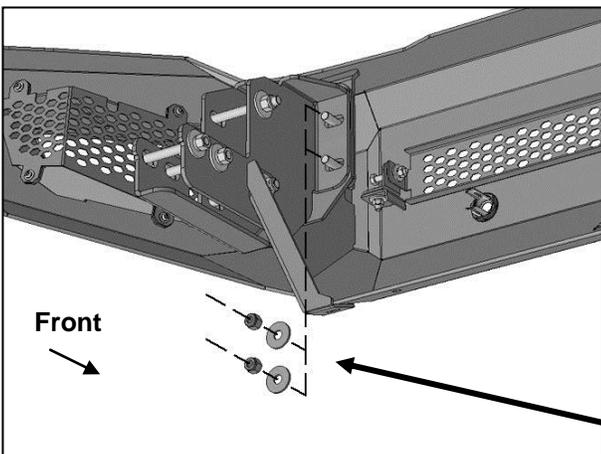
Thread Plastic Retainers onto Bolt Plates to hold in position
